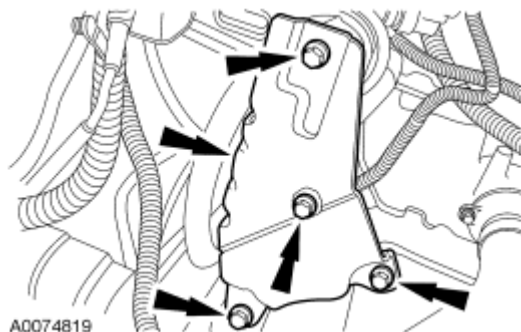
Locating Engine Roll Restrictor Bracket Bolts
